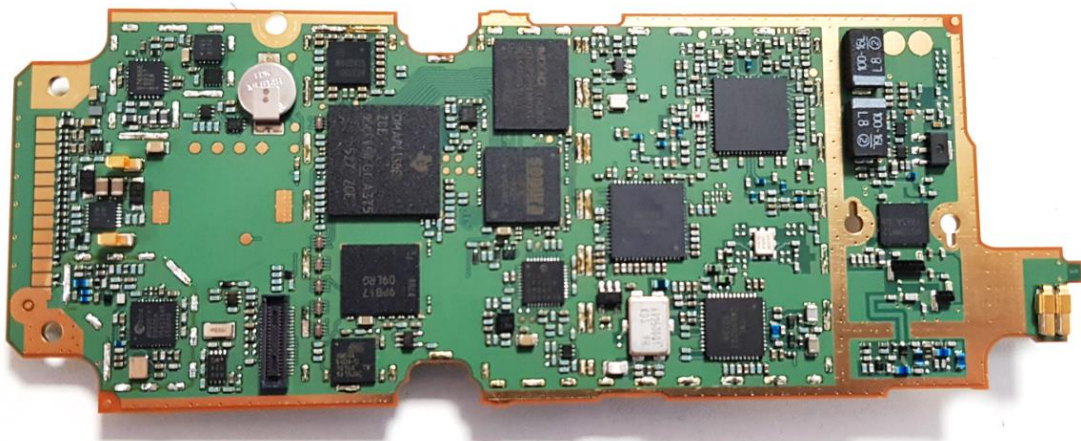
XX6SC2028 Main PCB Bottom View with Cans Removed
